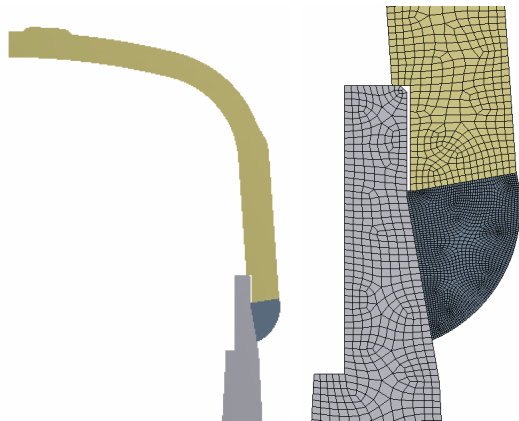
Axisymmetric model of the top cover of the compressor housing and FEM mesh refined at welding
